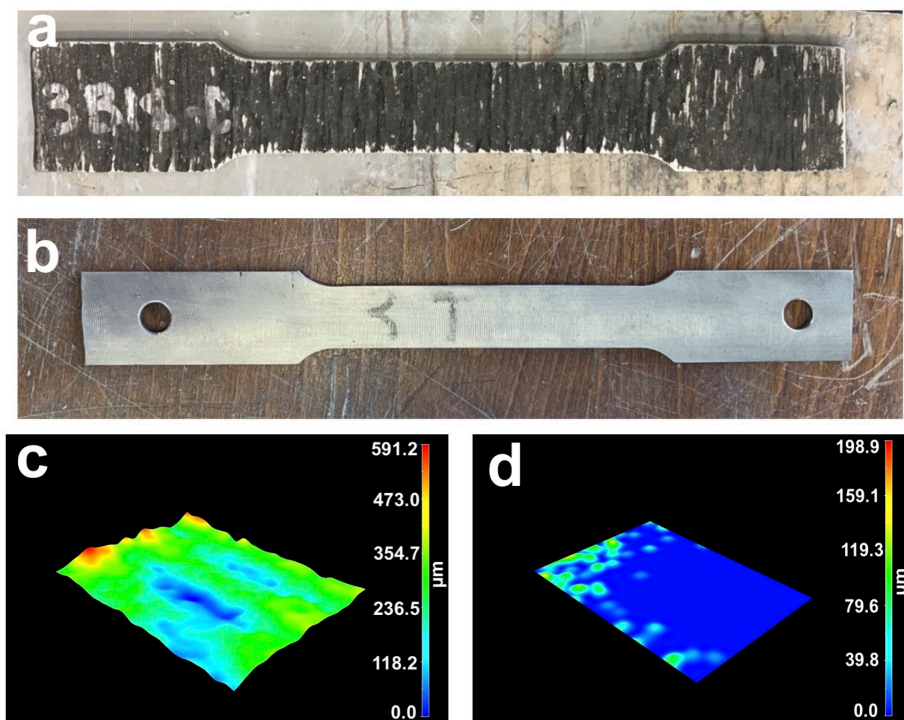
Tensile specimen cut from WAAM plates: (a) as-printed and (b) after surface milling; surface topography images obtained with 3D-Digital Microscopy of the specimen (c) as-printed and (d) after surface milling
